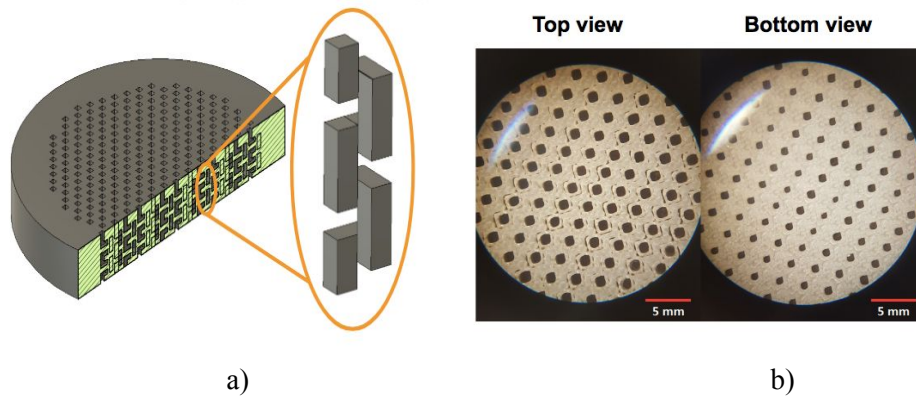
a) Tangential plane of the 3D 1.0mm tortuous path design filter with a close-up view of the airflow pathway. b) Top and bottom layer of the filter after 3D printing.
